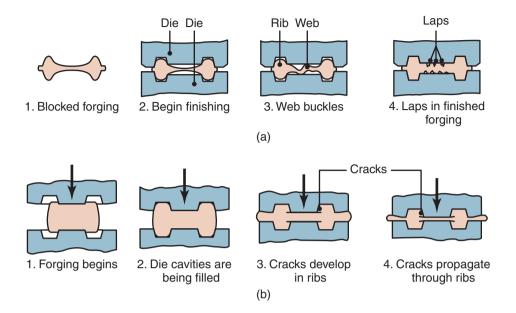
Examples of defects in forged parts. (a) Laps formed by web buckling during forging; web thickness should be increased to avoid this problem. (b) Internal defects caused by an oversized billet. Die cavities are filled prematurely, and the material at the center flows past the filled regions as the dies close.
